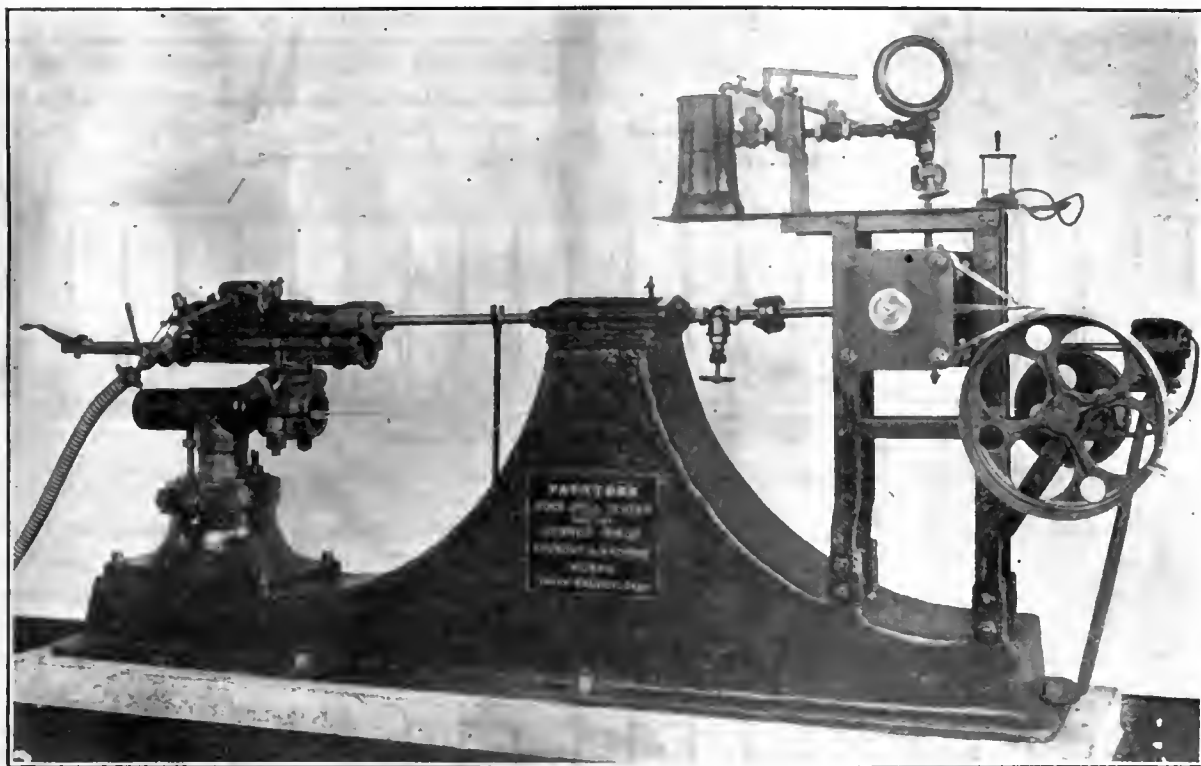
TESTING MACHINE, WITH DRILL IN PLACE FOR TESTING.
